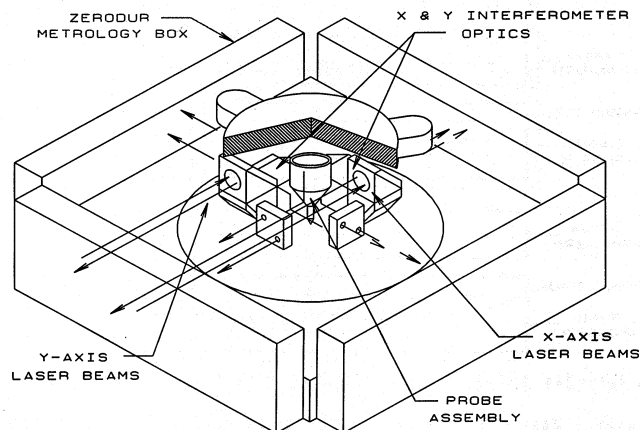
Metrology Frame of the Molecular Measuring Machine [14]
